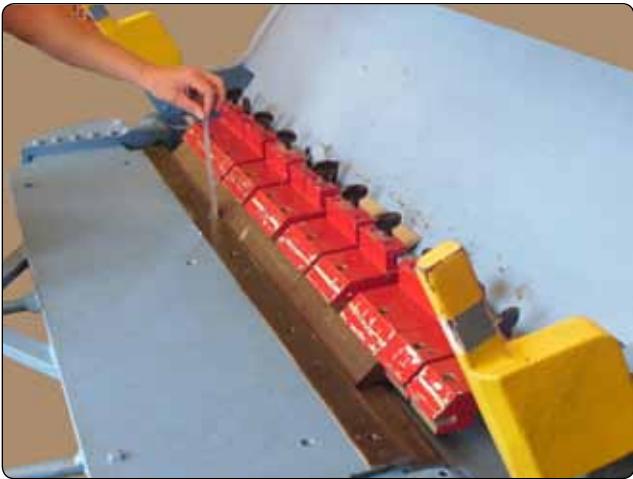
Brake nose gap adjustment with piece of material same thickness as part to be formed.
